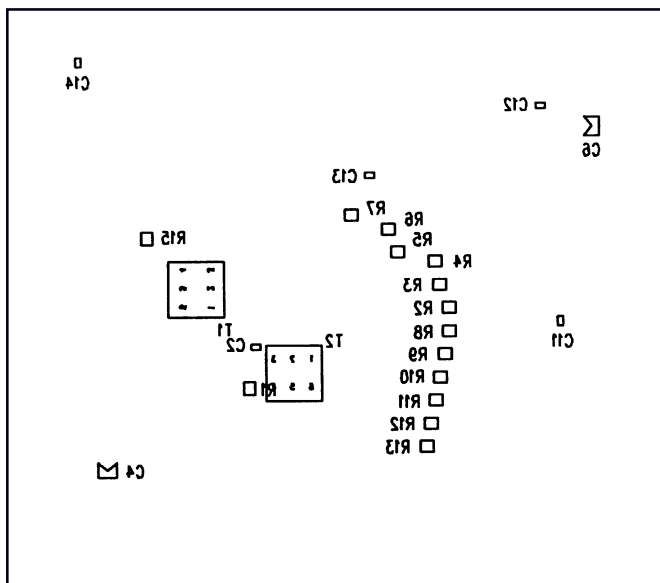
AD9042ST/PCB Bottom Side Silk Screen
